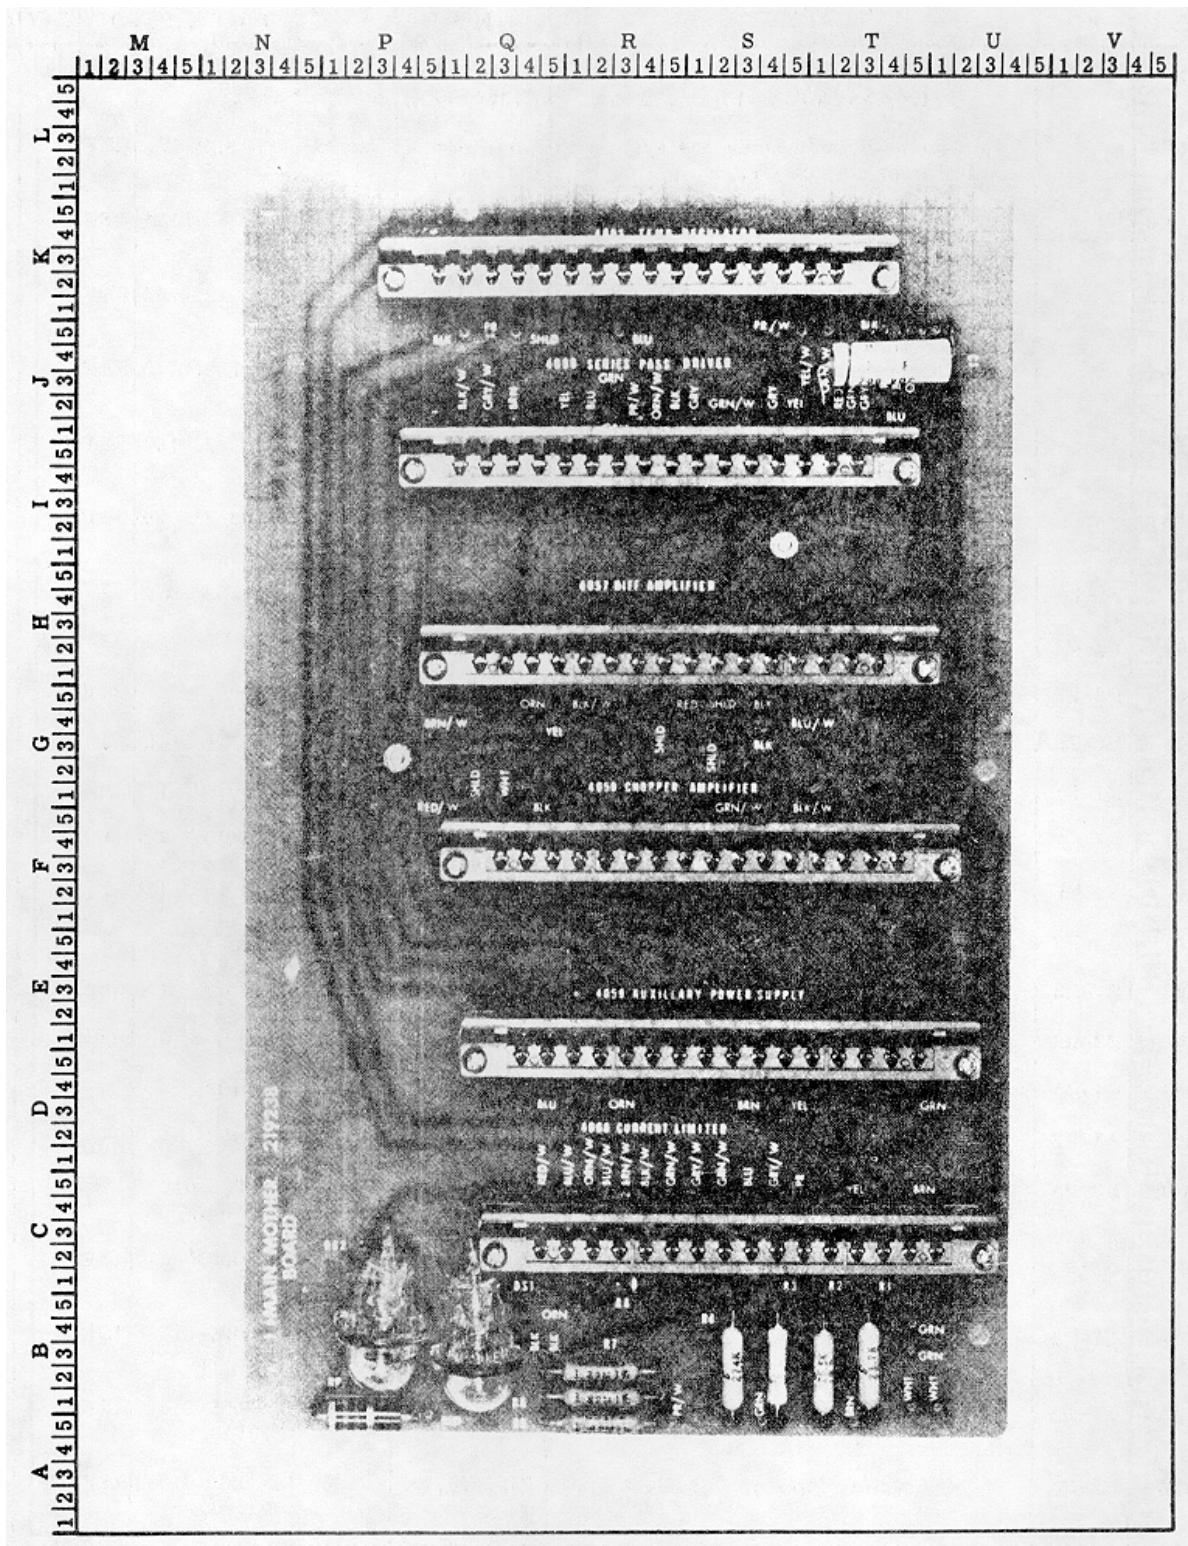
MAIN MOTHER BOARD P/C ASSEMBLY
